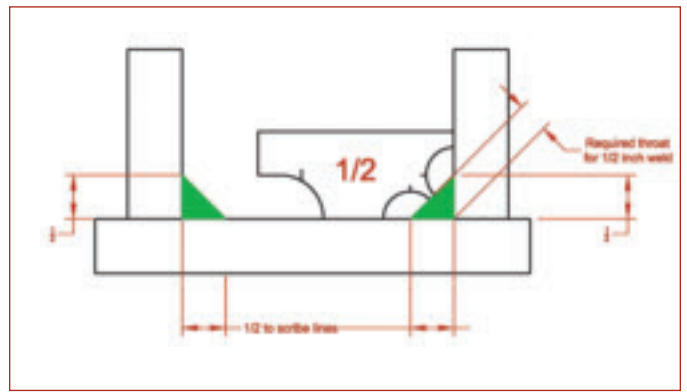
The 1/2-in. gauge used to verify the throat is properly sized for a 1/2-in. fillet weld.
